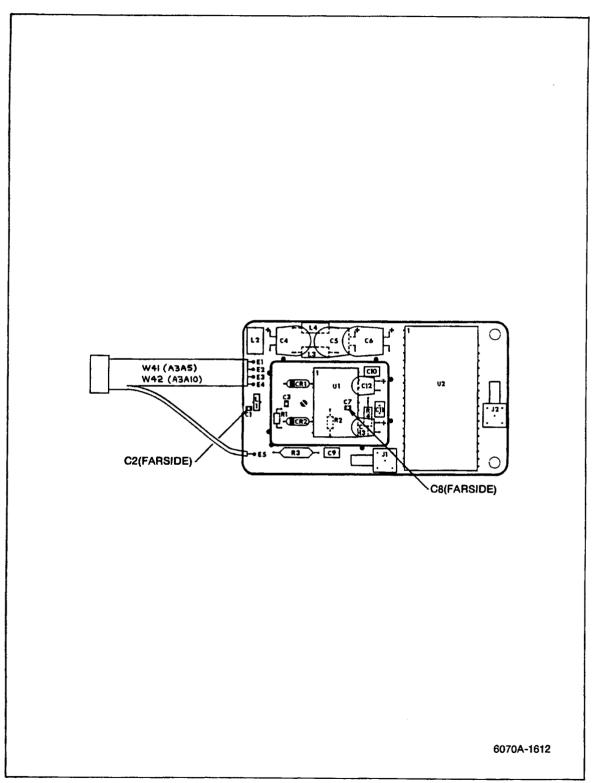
A3A5 VCO Resonator PCB Assembly
